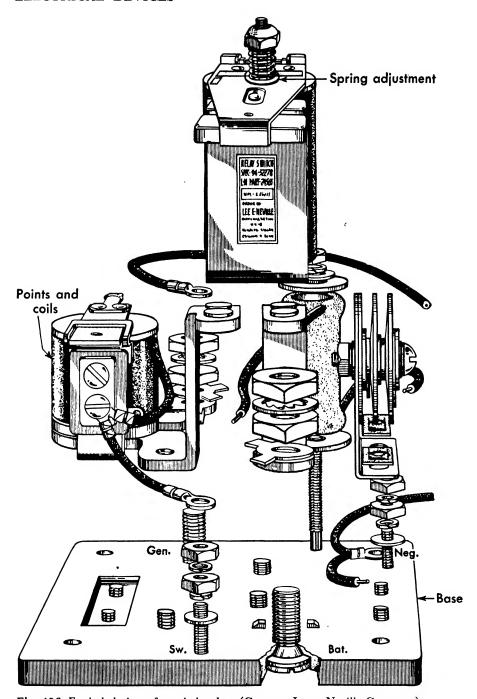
Exploded view of a switch relay. (Courtesy Leece-Neville Company)
